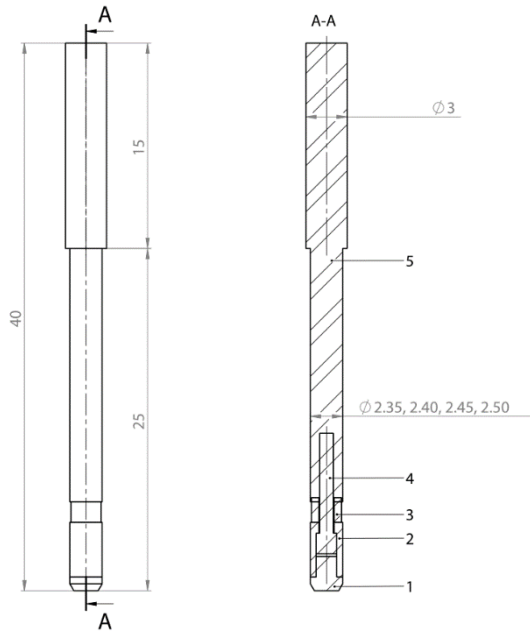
Composition drawing of the unstable design of the prosthesis, with: -1- a bottom cap; -2- a bottom cylinder; -3- a PUR(r) spring; -4- a hammer; -5- top cylinder.
